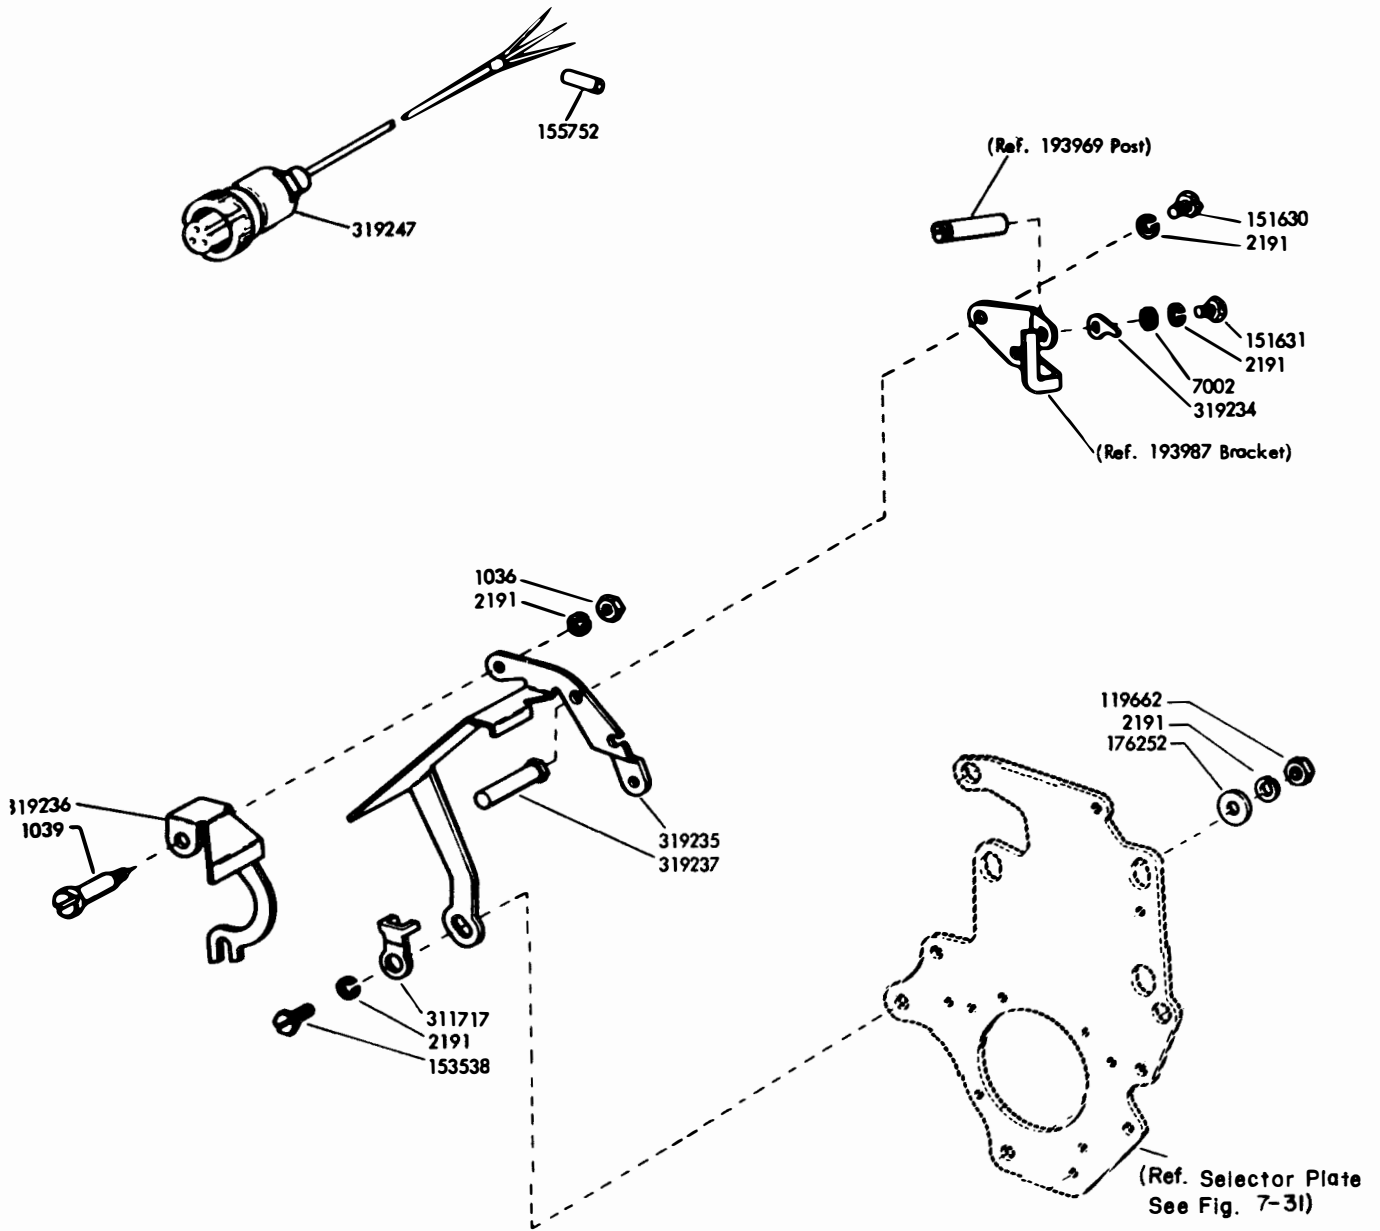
Selector Mounting Components for Typing Reperforator - Used on Low-Level Sets
